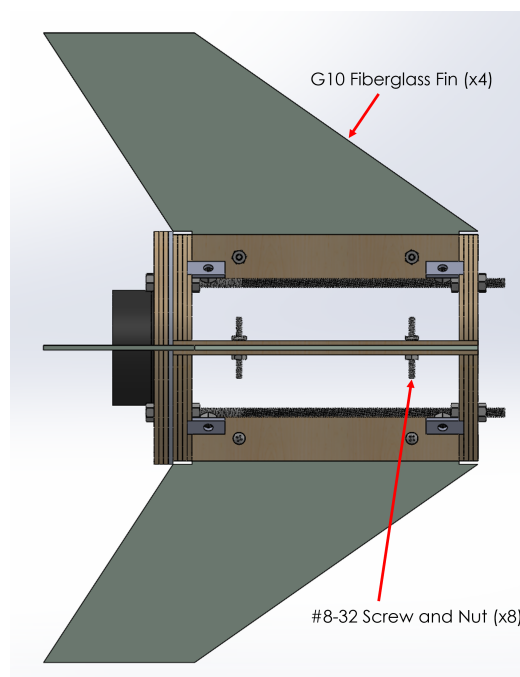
Fins and fin hardware attached to removable fin system assembly.
